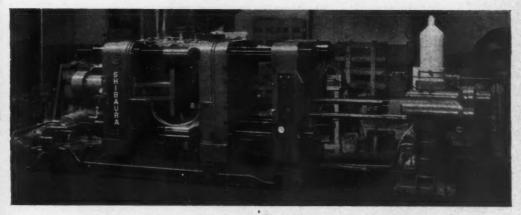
Although this machine, of 800 tons locking force, is the largest for pressure die casting so far completed by the company, work on the building of a machine of 1,500 tons capacity is already well advanced
